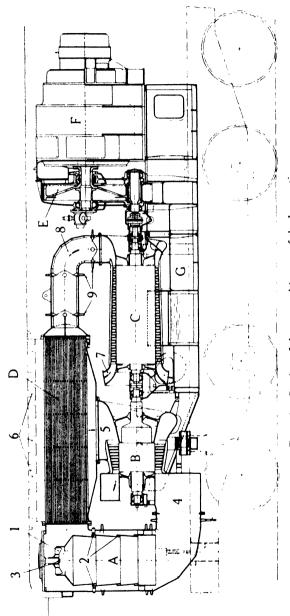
Section of the gas-turbine set of the locomotive. E. Gear. F. Generator.
